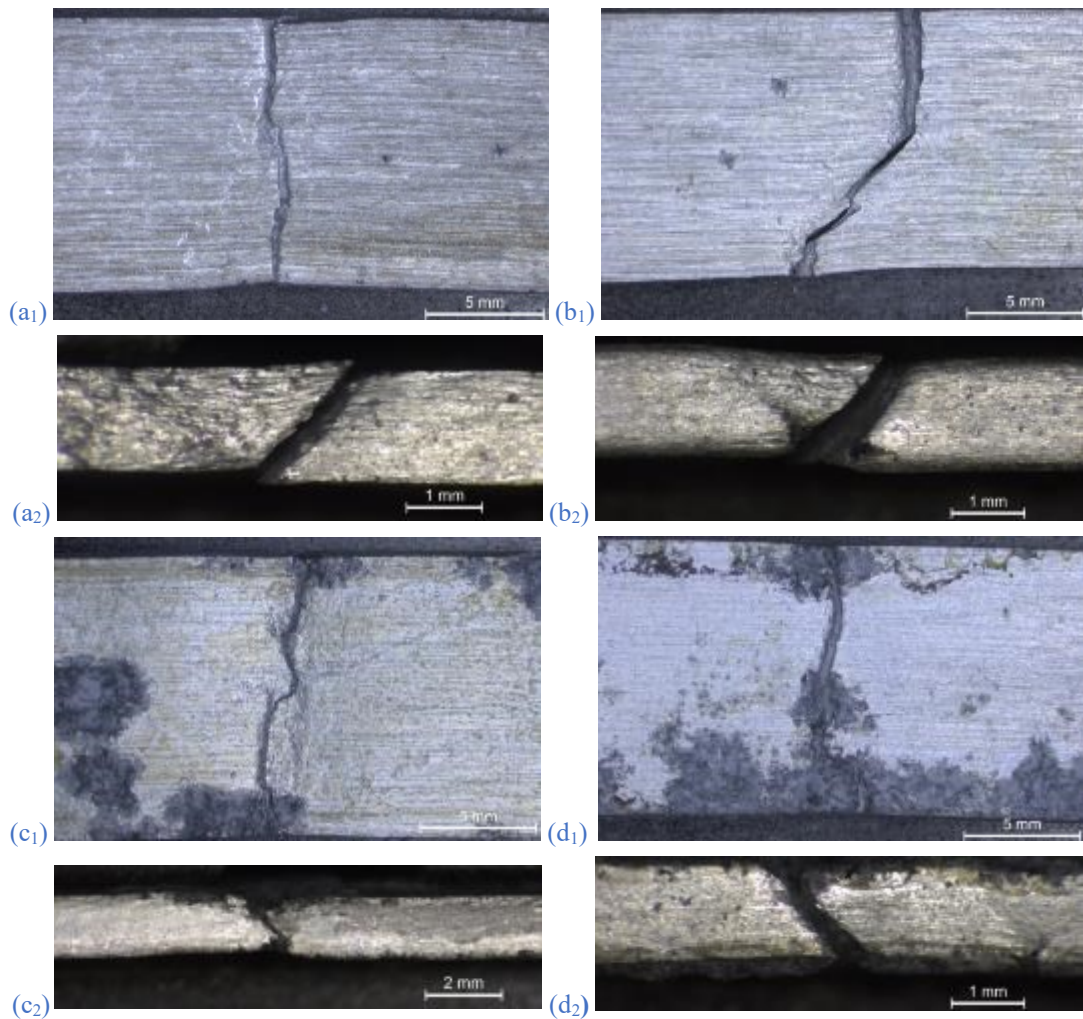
Typical stereoscopic photographs of AA2198-T351 specimens corroded at large surfaces after the tensile tests for (a) 2 h (b) 6 h (c) 24 h and (d) 48 h of exposure for (1) large surfaces and (2) side-surfaces of the specimens.
